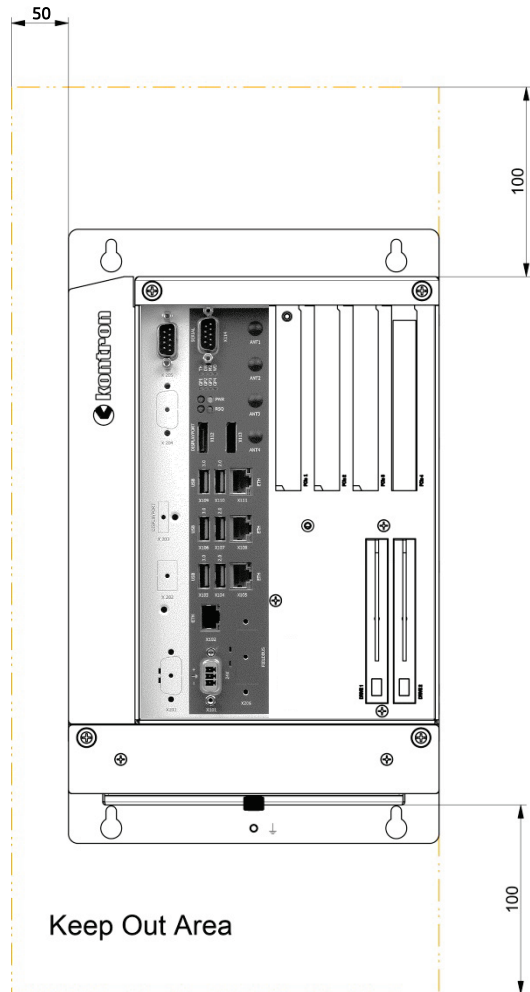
Keep out area for mounting around KBox C-104-TGL-2 (front side view without fan tray)
